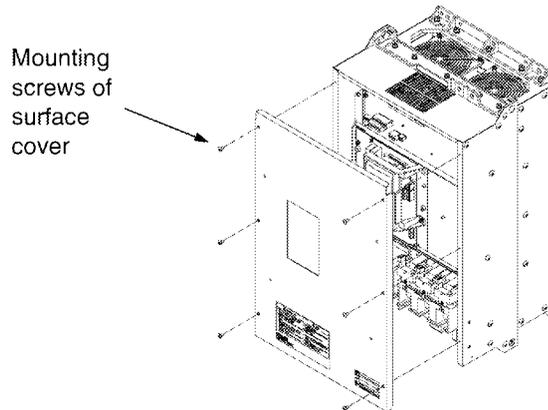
Removing the surface cover (for inverter of 30 kW or more)
